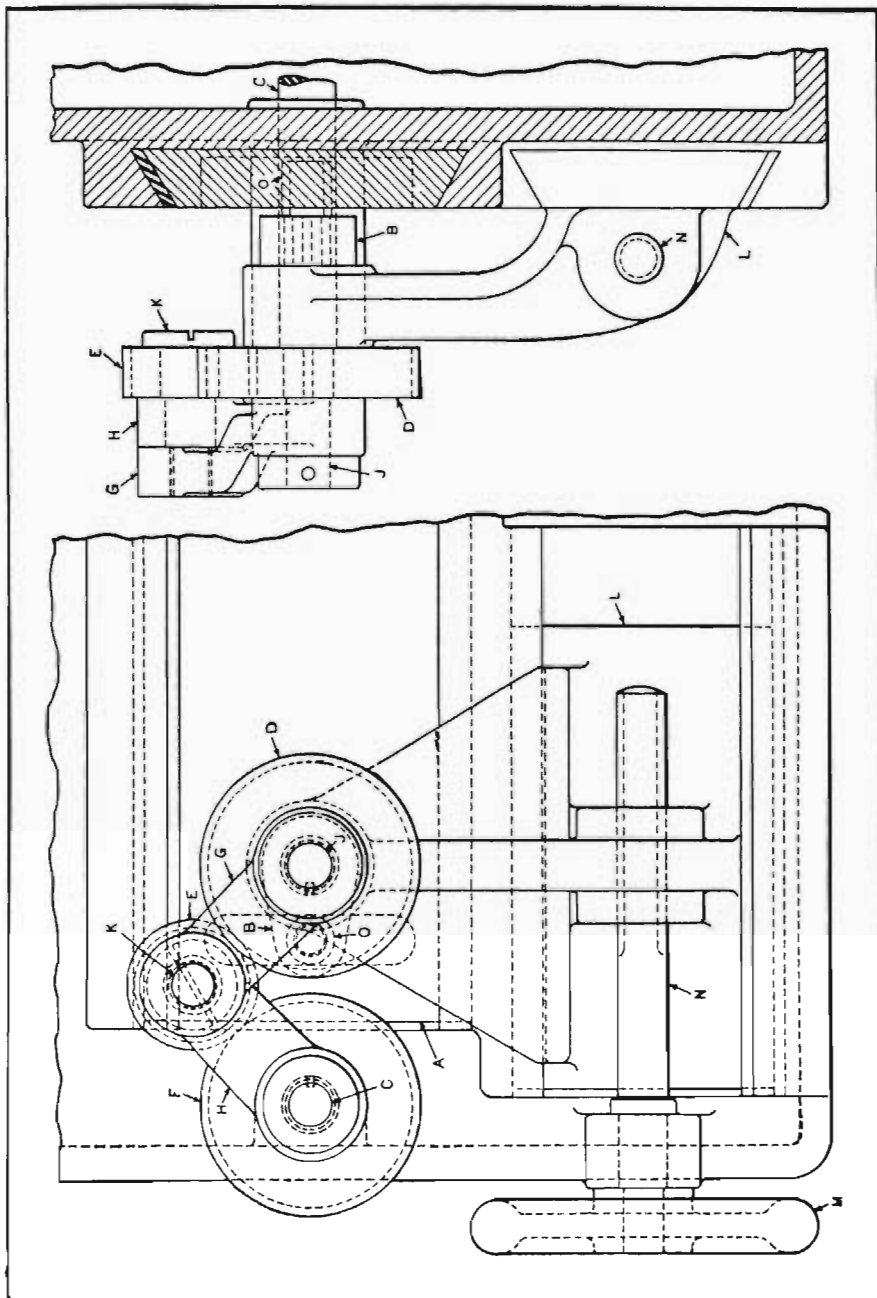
Reciprocating Slide with Mechanism for Adjusting Operating Position
